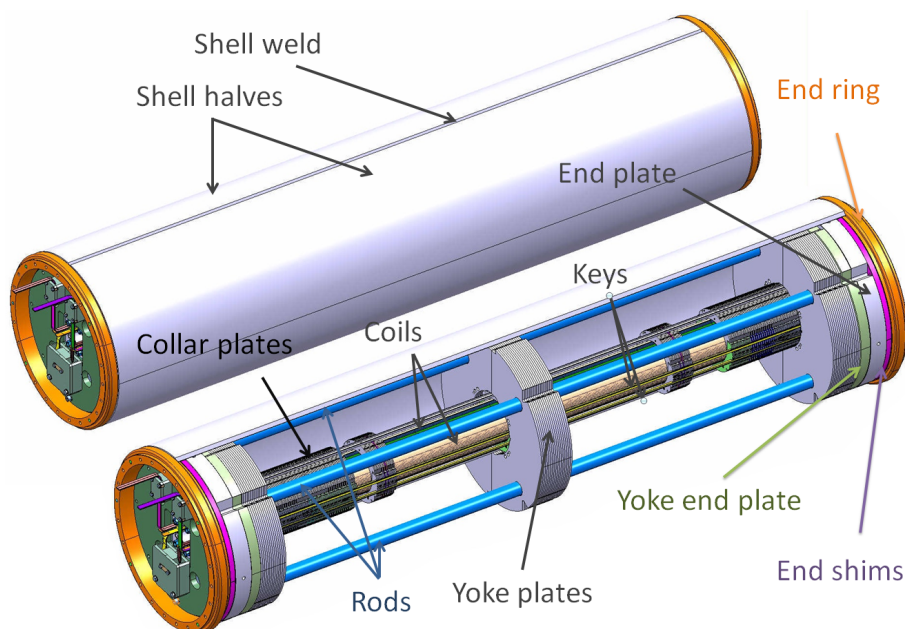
A Single aperture 11-T dipole magnet (1-in-1) with and without a shell. The shell assembly is to be welded together from two rolled metal plates. The yoke is made by stacking steel plates. [27]
